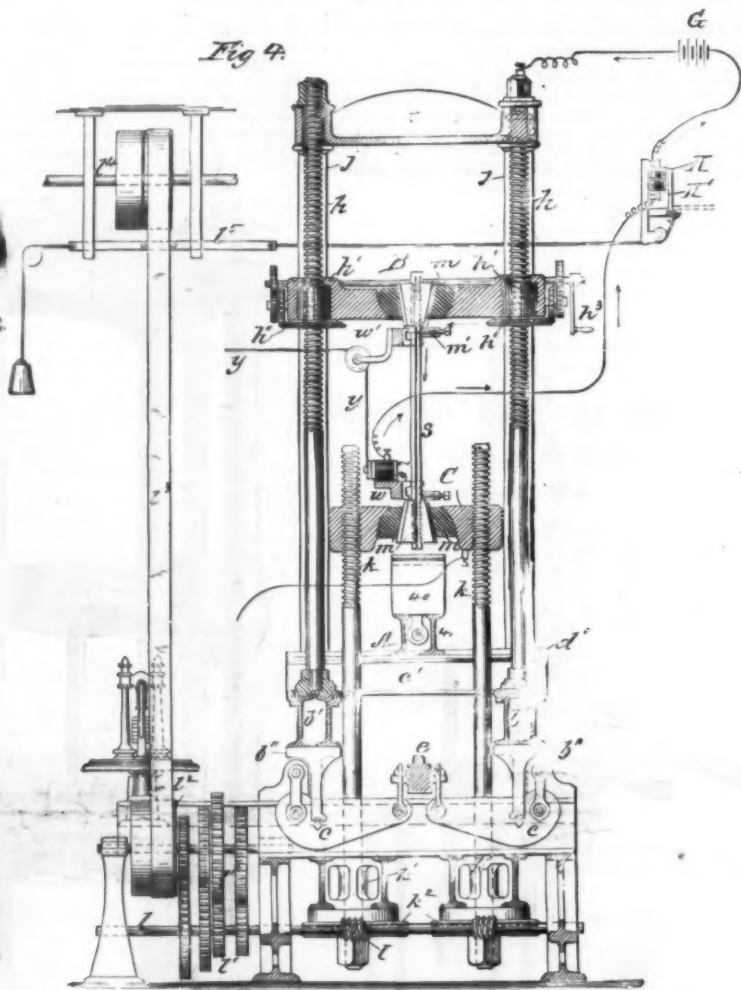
TESTING MACHINE.—SECTIONAL VIEW SHOWING WORKING PARTS.
